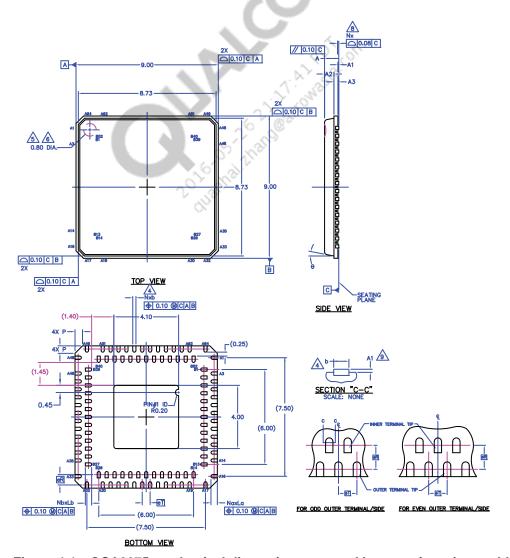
QCA8075 mechanical dimensions, top and bottom views (assembly 1)
